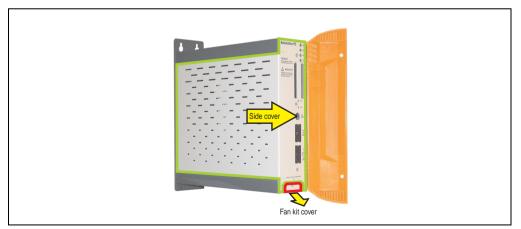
APC620 1PCI slot - Remove side cover and fan kit cover
